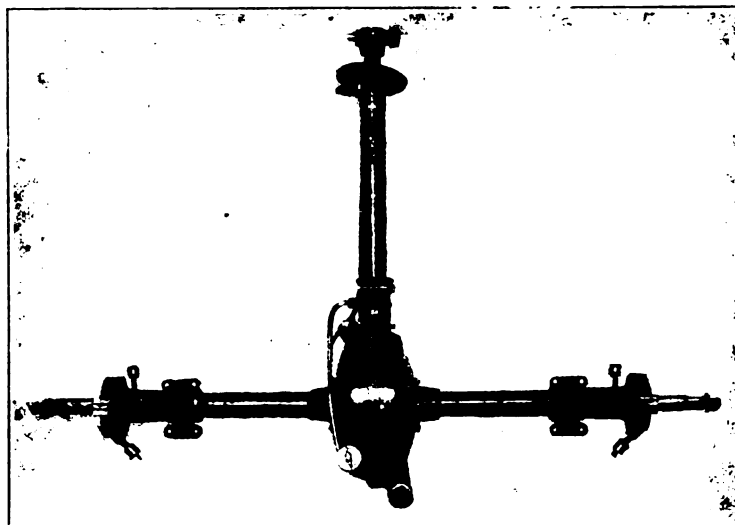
The Clement Cardan Shaft and Live Axle.
